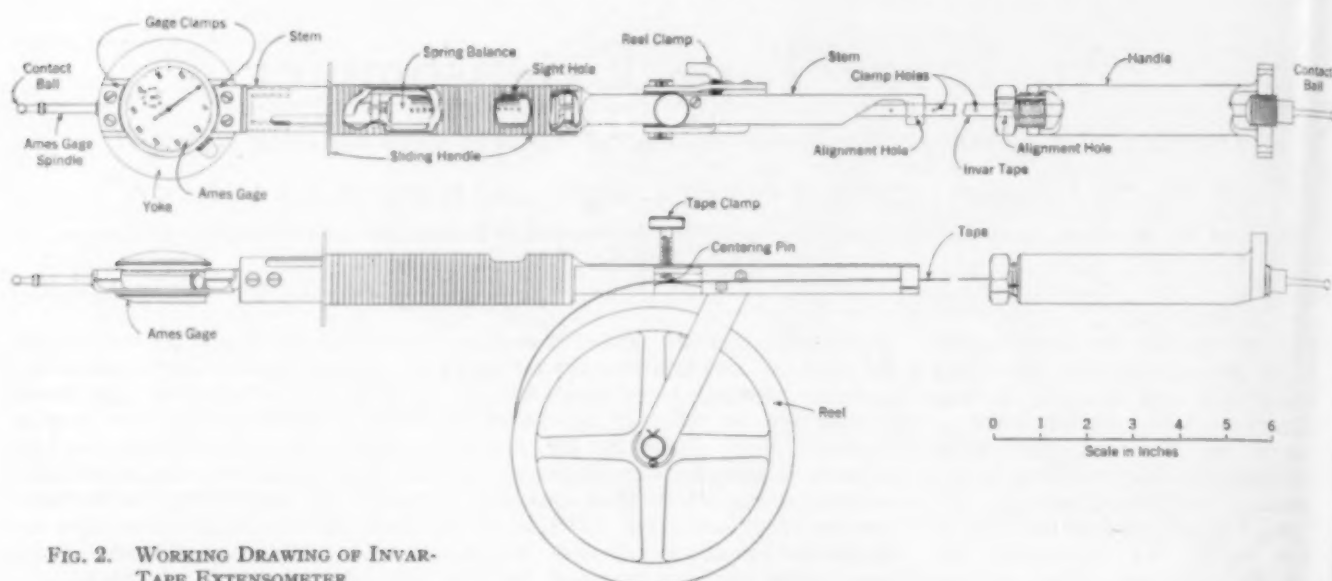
WORKING DRAWING OF INVAR-TAPE EXTENSOMETER
